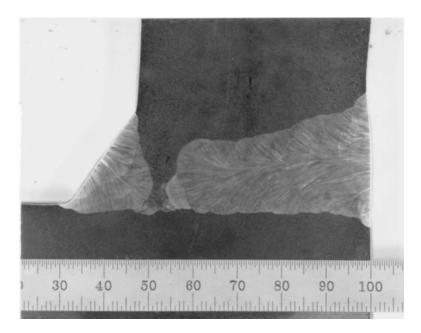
Cross Section of Weld in Mockup BWRVIP-A
